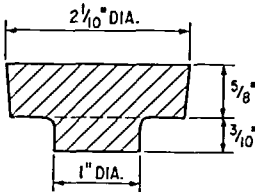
Cross-section of the compression-molded test piece designed for bonding and tensile breaking.
